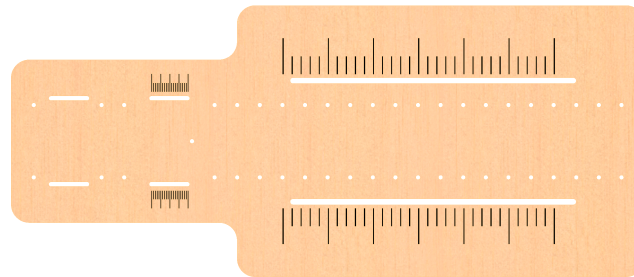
CAD model of the mounting plate that holds the feed horn and transmitarray, and attaches to a rotation platform in the measurement chamber. The feed horn is mounted in the slots on the left and the position of its phase center can be tuned by sliding it along these slots. In a similar manner, the transmitarray is mounted in the slots on the right and the focus distance can be adjusted from 100 mm to 400 mm. All the other holes are possible mounting points for attaching the plate to the rotation platform.
